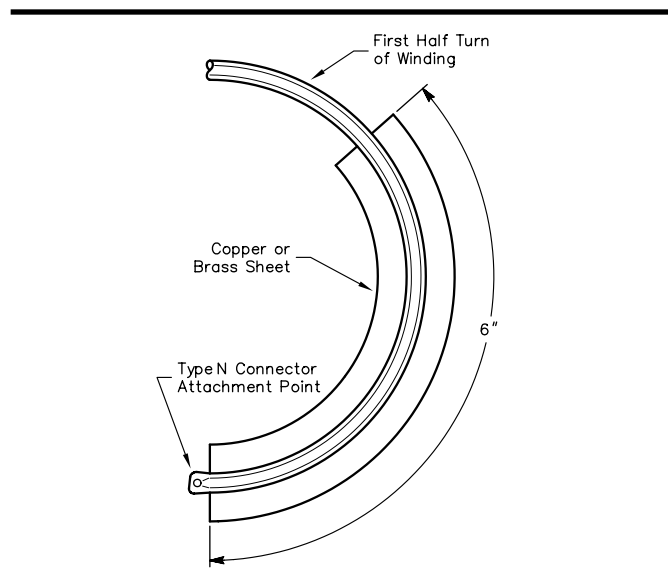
If the match to the antenna cannot be obtained with the tubing alone, a 6-inch piece of copper flashing material can be soldered to the bottom of the first turn of the helix, starting very close to the feed point. The spacing can then be adjusted for best match as described in the text. When the appropriate spacing has been found, affix Teflon or polystyrene blocks between the screen and the winding with silicone sealant to maintain the spacing.
